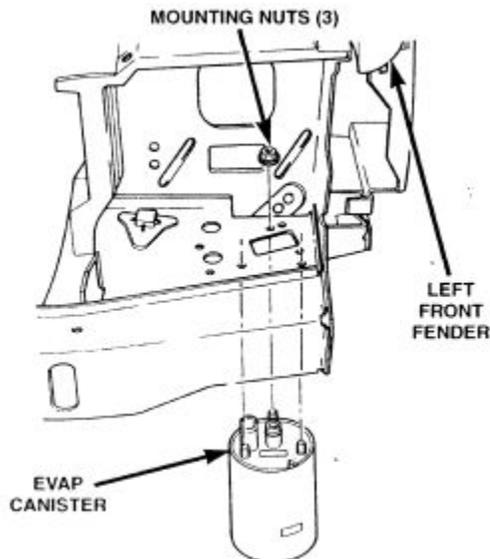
Exploded view of the cannister location except the California emission package-1996 Grand Cherokee model
